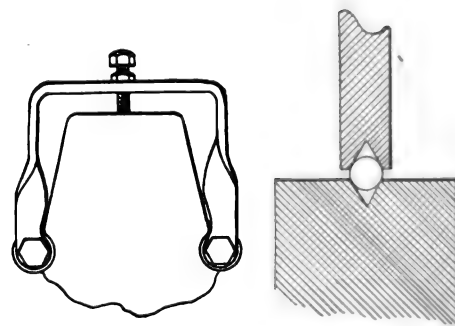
DETAILS OF CLAMP AND SUPPORT FOR TOOL CARRIAGE.
